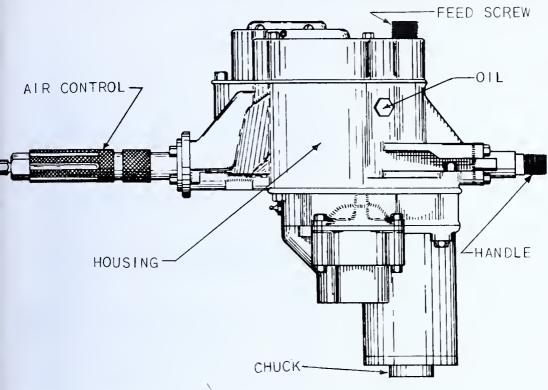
No. 3 Compound Tube-Expanding Machine
